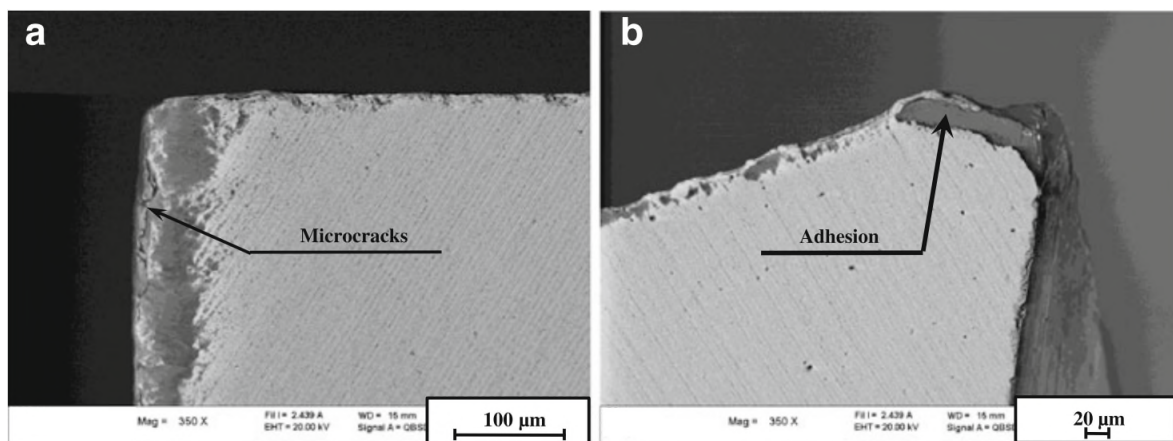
Images of tool rake face with wear by; (a) microcracks, and (b) built-up edge [81].
